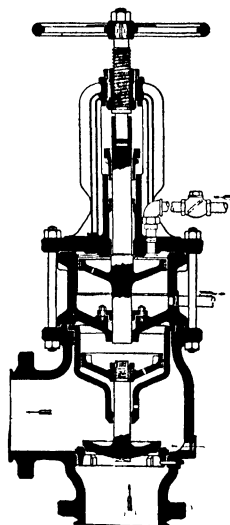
Double-acting automatic boiler stop valve. (Schutte and Koerting Company.)
